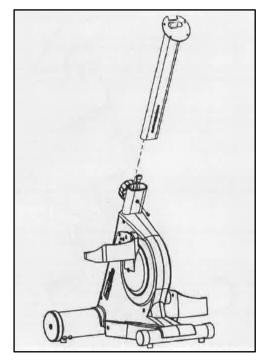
Use the guide wire to move the display cable up through the handlebars stem tube
